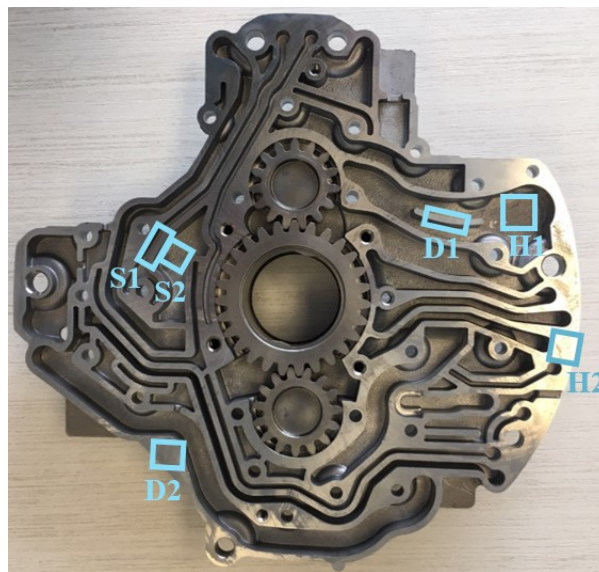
Measurement locations on the cast pump housing assembly:
